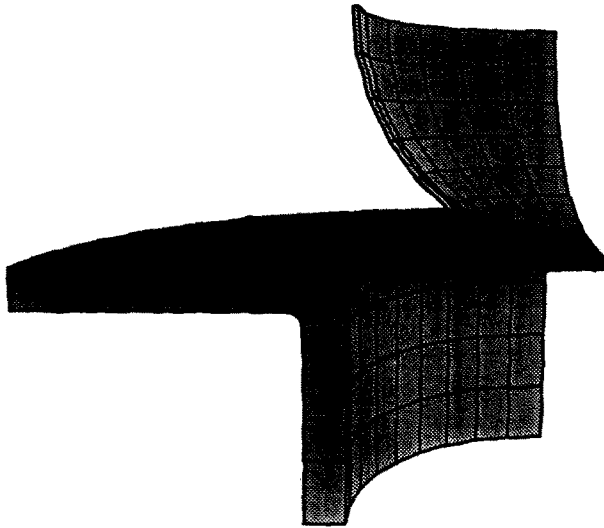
(a). Three dimensional deep drawing metal forming problem, undeformed configuration.
